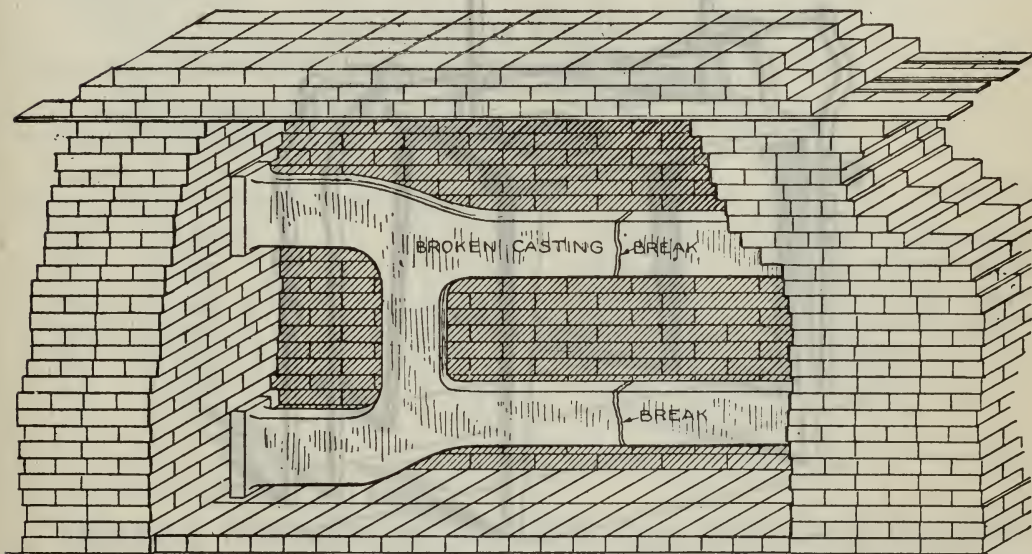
,468.—Quickly constructed furnace for brazing; view showing broken casting in position ready for brazing.
